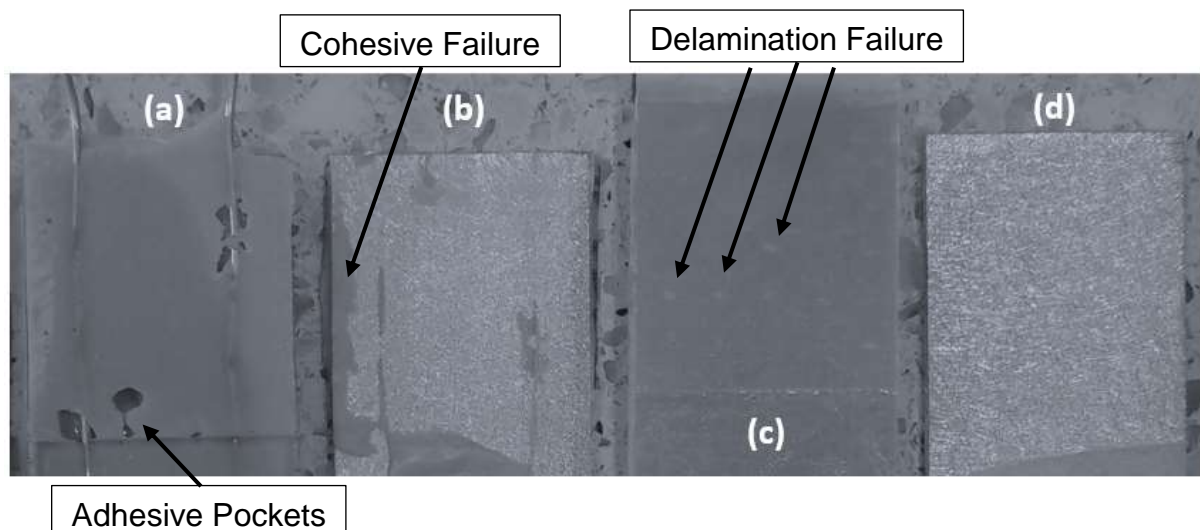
Photograph showing the typical failure surfaces obtained from tensile testing. (a) GFRP adherend, and (b) aluminium adherend of adhesively bonded single-lap joint; (c) GFRP adherend, and (d) aluminium adherend of co-cured single-lap joint.
